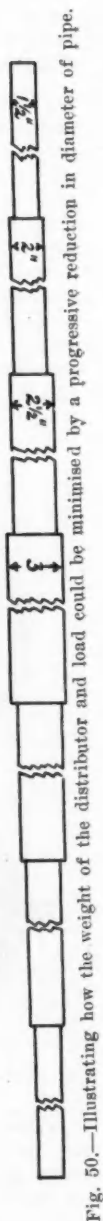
Illustrating how the weight of the distributor and load could be minimised by a progressive reduction in diameter of pipe.
